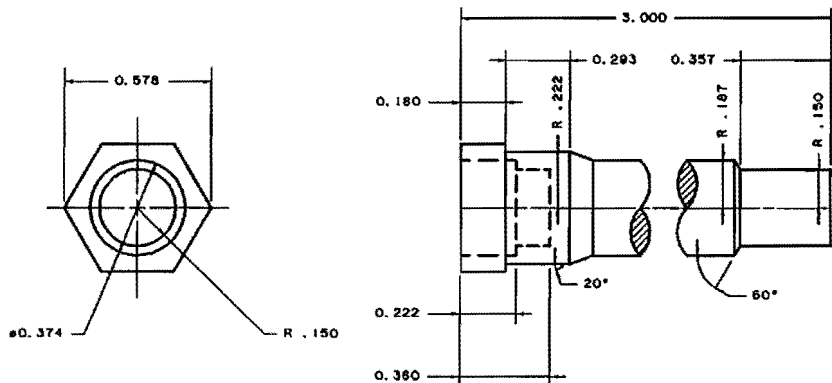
Completed and Dimensioned Adjusting Screw Drawing
